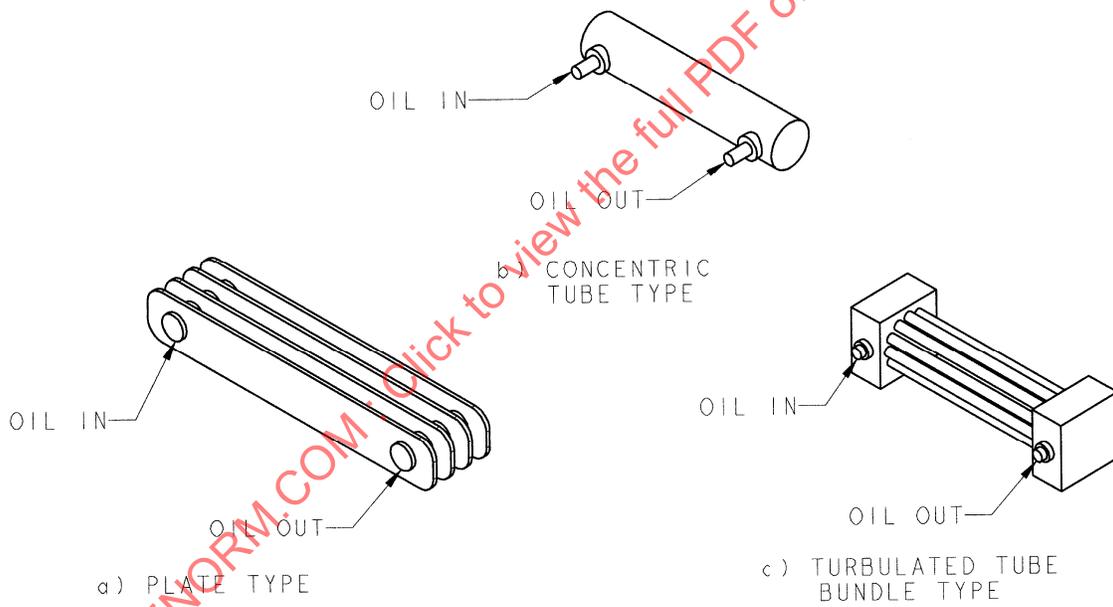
OIL COOLERS FOR MOUNTING IN RADIATOR OUTLET OR BOTTOM TANKS
